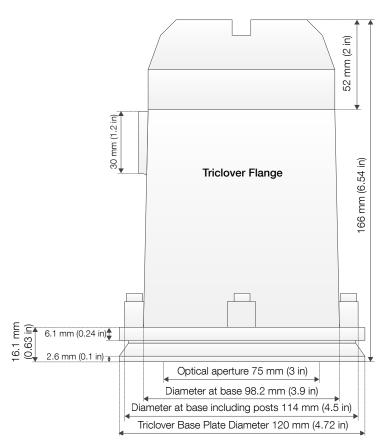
4. Mechanical Dimensions of the Triclover LM80 Level Transmitter(1)
